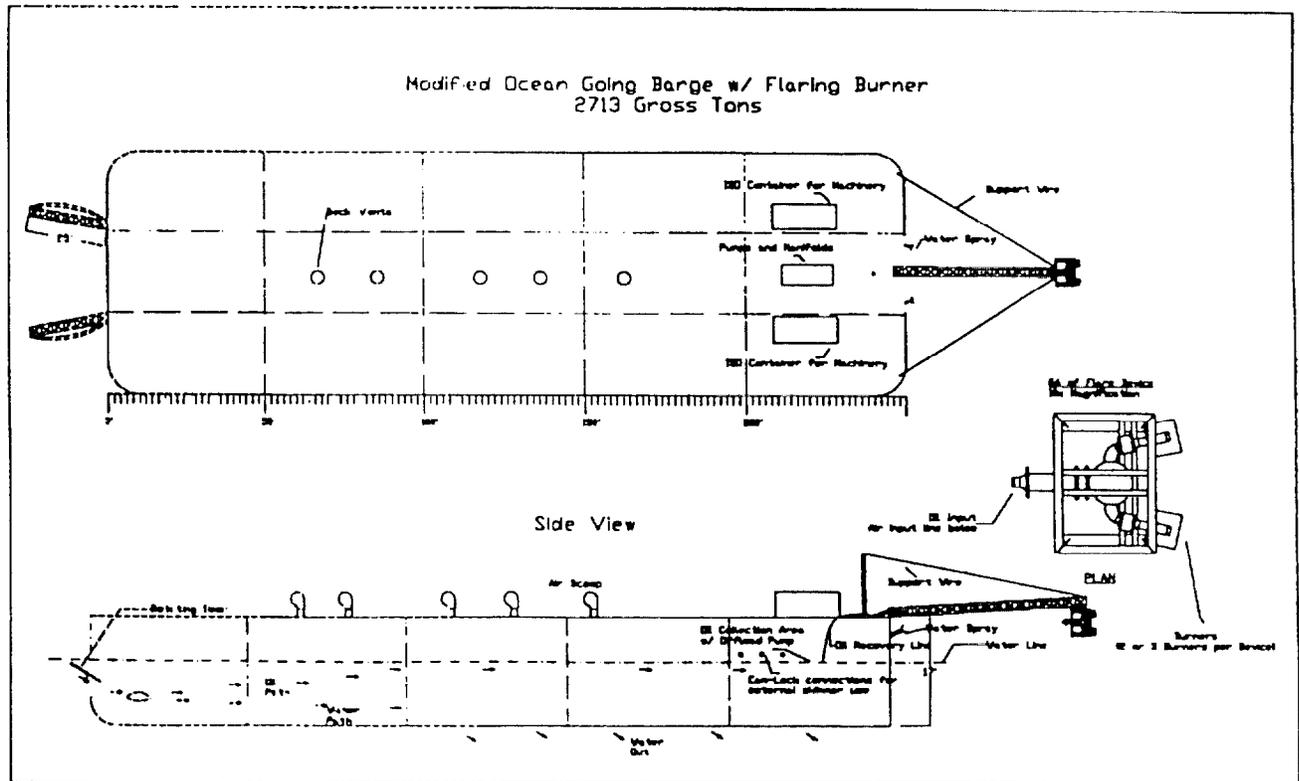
Basic Design for Concept IIB - Oil Burning Barge Equipped With Flaring Burner
